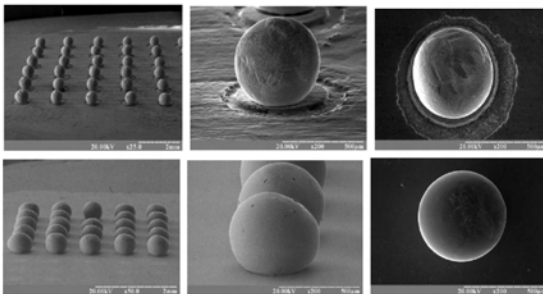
Melted solder balls on PCB and BGA(Sn-3.5Ag,  $\phi 500\mu\text{m}$ )
